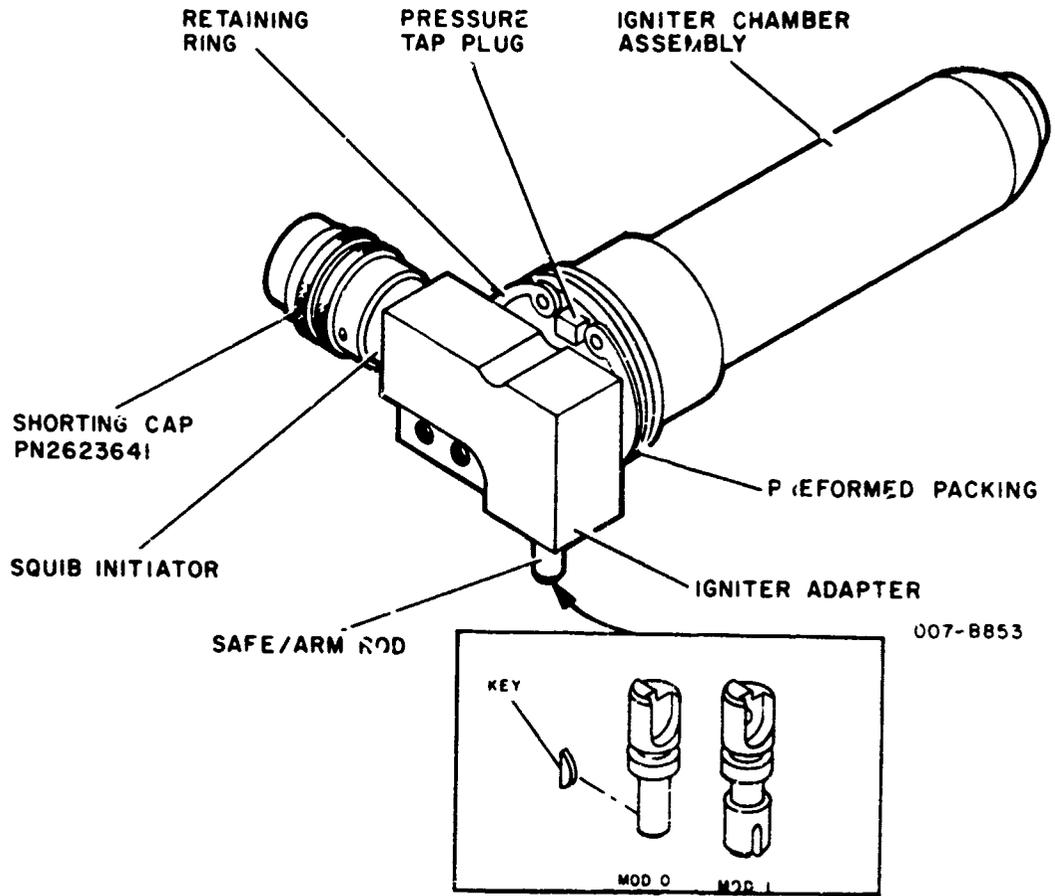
SHRIKE Mk 274 Safe/Arm Igniter Assembly.
